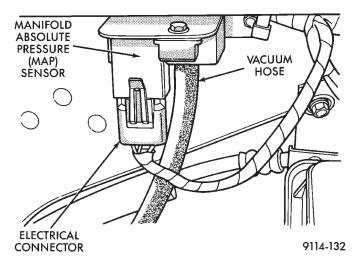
Manifold Absolute Pressure (MAP) Sensor—2.5L TBI Engines
